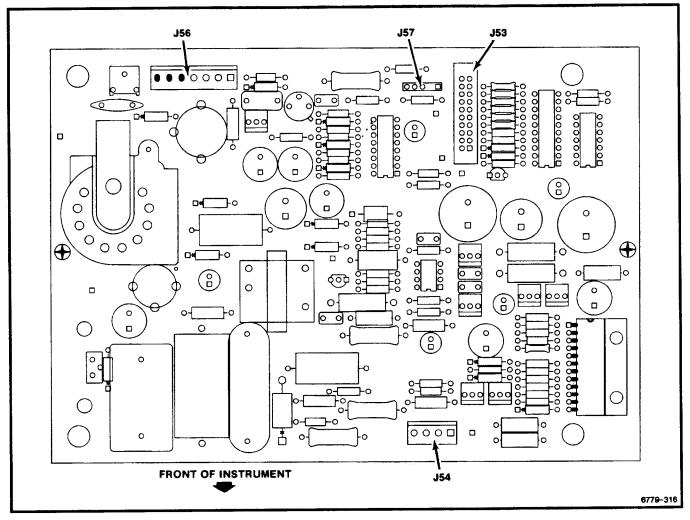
Connector locations for removal of the A8 CRT Driver board.
